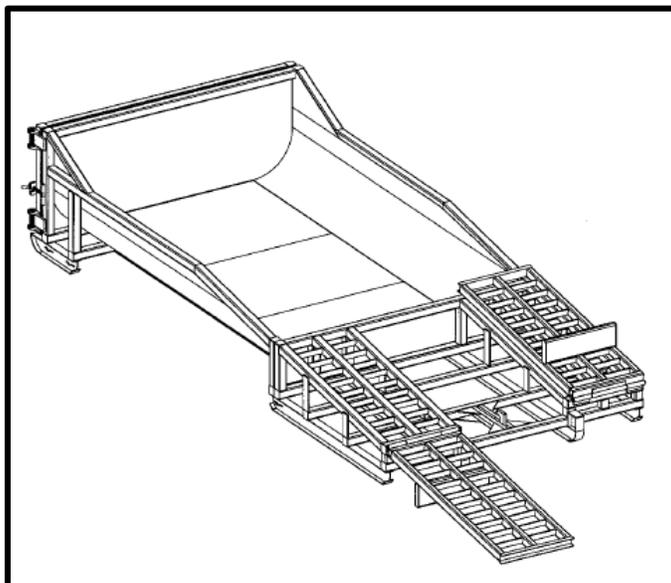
Prefabricated Concrete Washout Container with Ramp.
